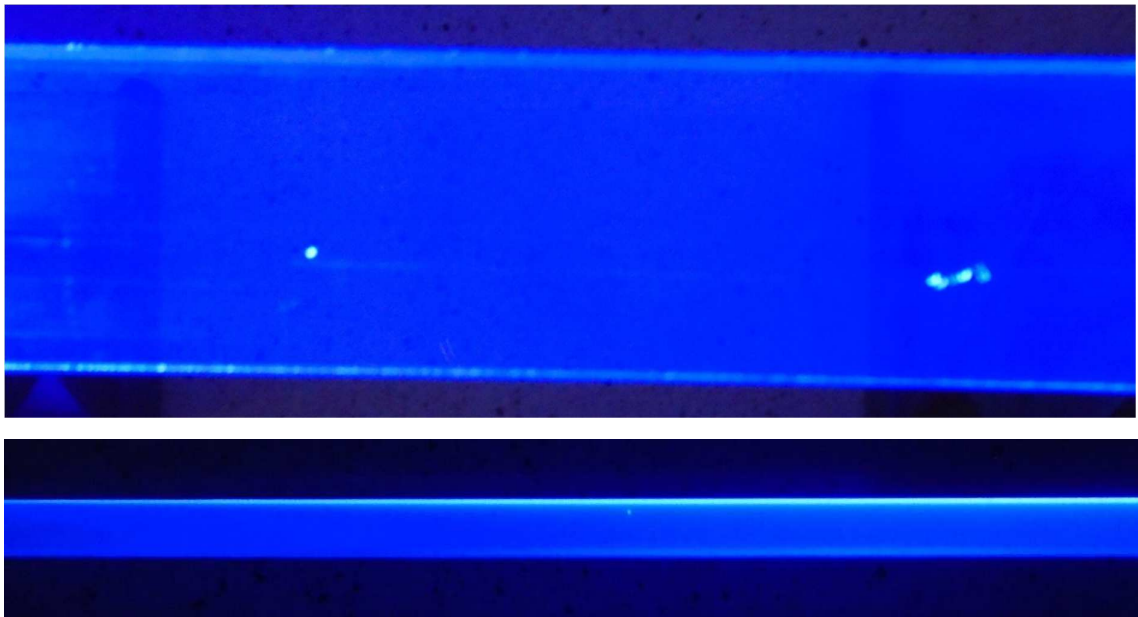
Strips with surface defects as seen under UV light: mat surface visible under UV light – many small glowing spots and haze; probably microcracks from manufacturing process
